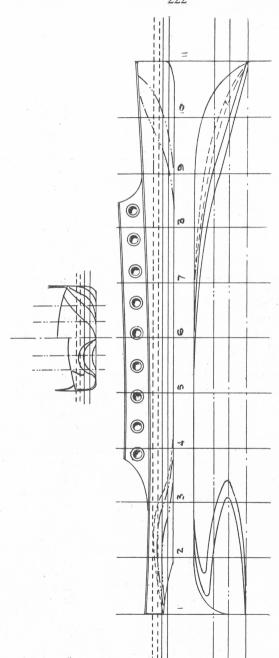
SHEER DRAUGHT RIVER FIRE BOAT.
